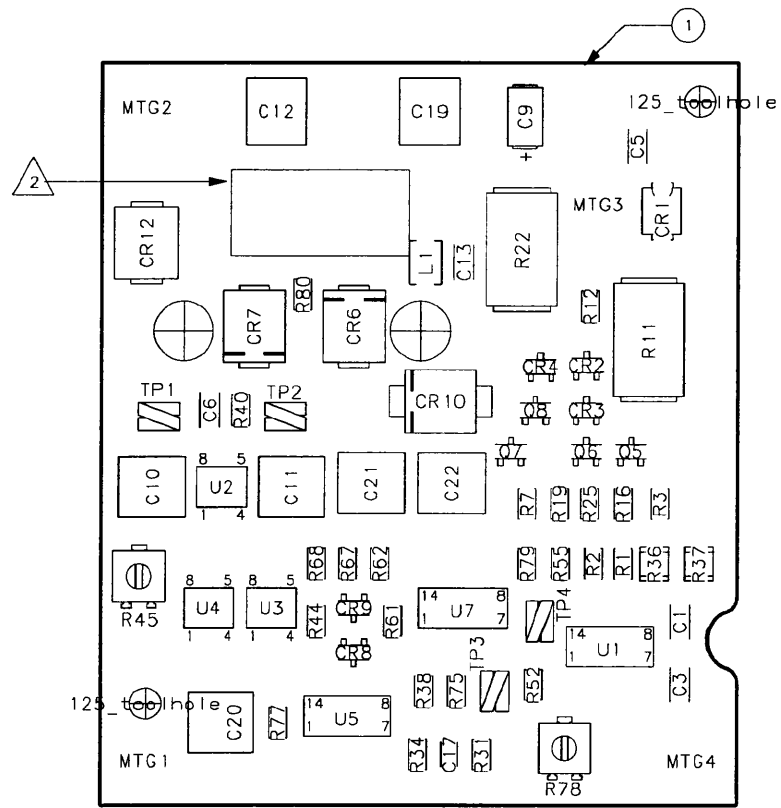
SERVO BOARD ASSEMBLY DWG 300-09087-0000
